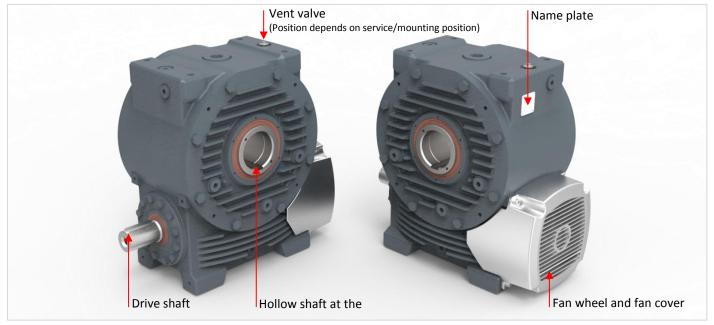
Design of basic version (shaft at input, hollow shaft at output), using the example of \$250.1 in service position B3
